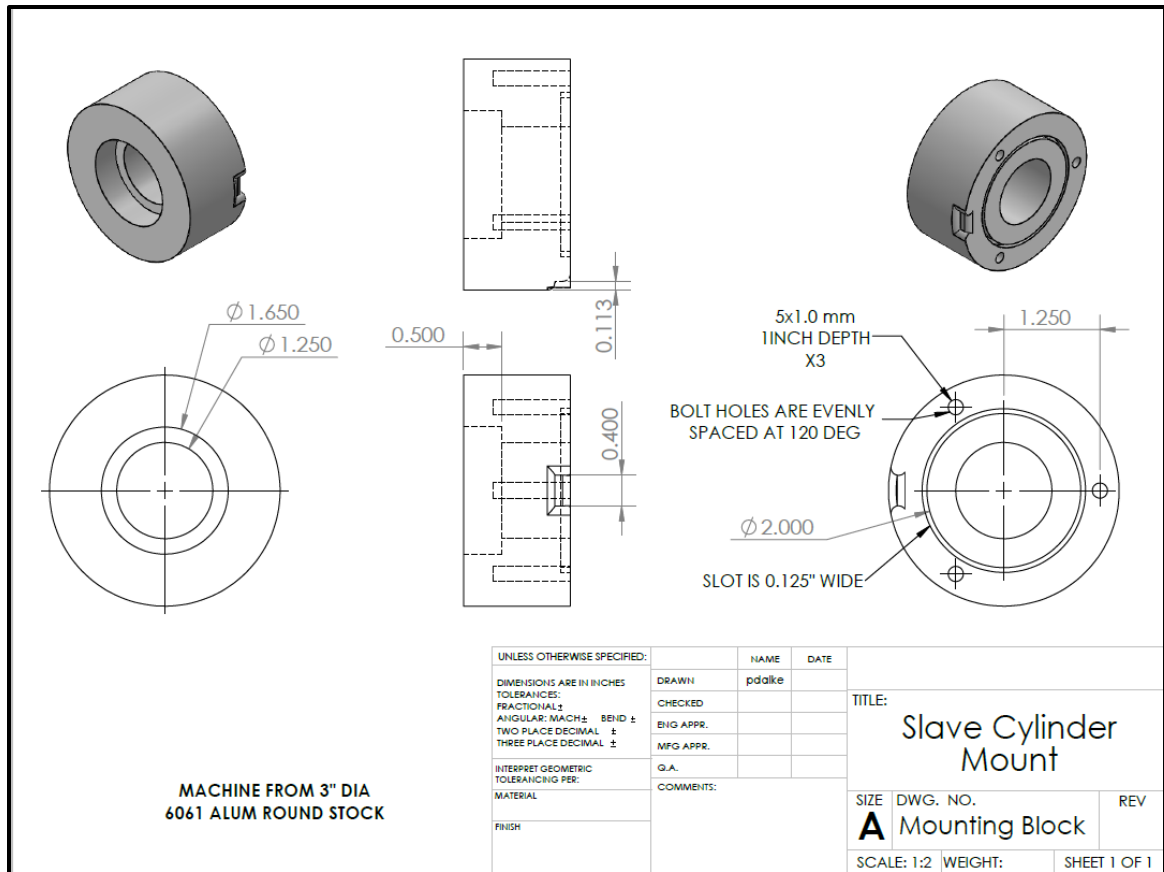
Engineering Drawing for Manufacture of Slave Cylinder Mount
